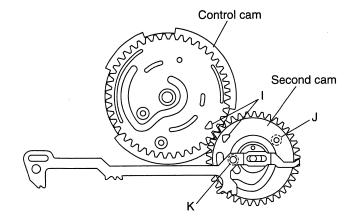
Gear Positioning 4 (Perspective View from Above)
